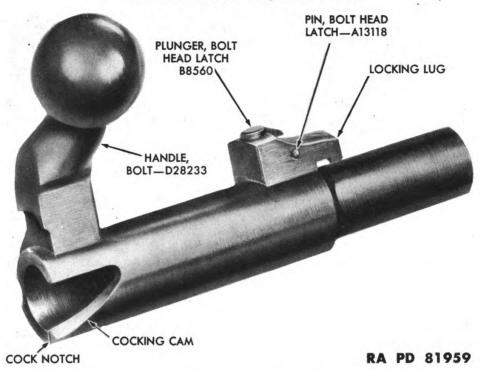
Bolt Handle Assembly of U.S. Rifle, Cal. .22, M1 — Side View
